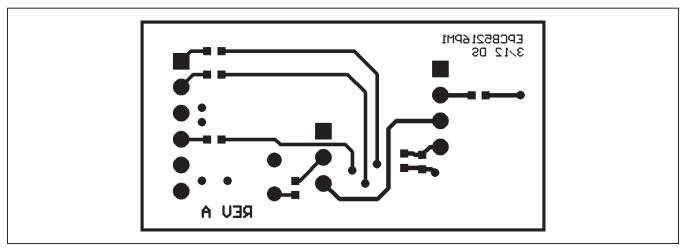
MAX5216PMB1 Peripheral Module PCB Layout—Solder Side
